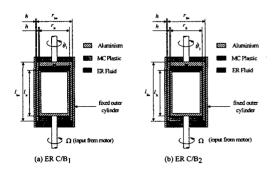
Geometry of the proposed ER clutch/brake actuators
